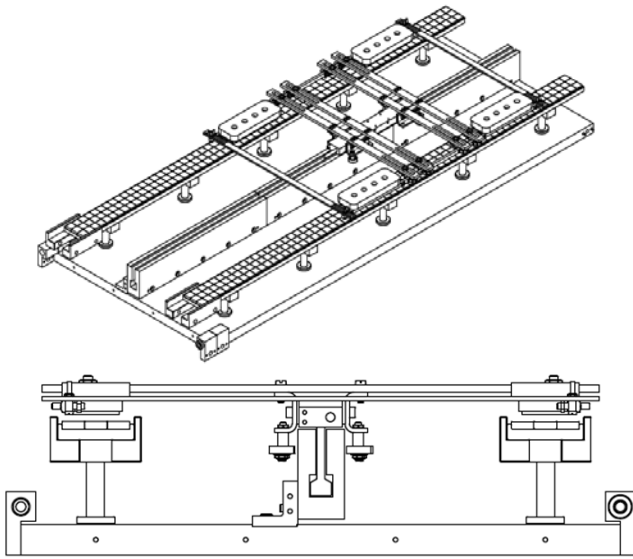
GABRIEL ground system test bench layout and cross section [3]
